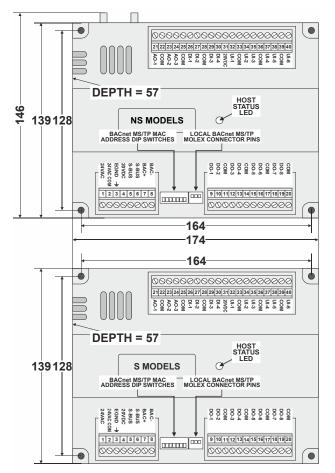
Panel mounting, dimensions in mm (S- and NSmodels)
